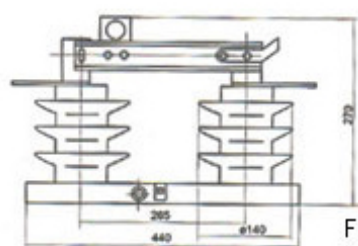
GW9-10 (W) 400 overall / 600 Dimension
